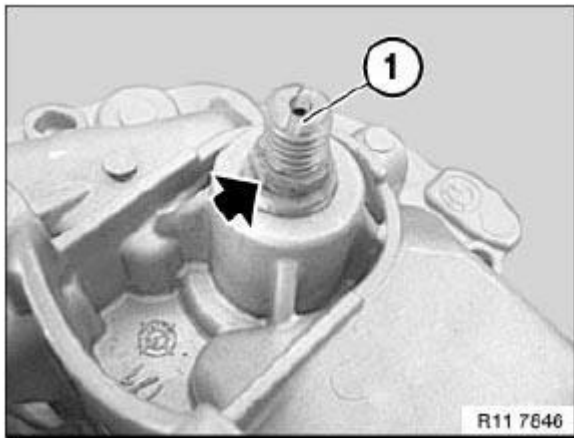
Identifying Pump Shaft Damage Area
